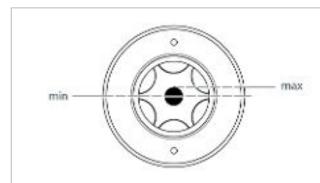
Oil sight glass on bearing casing max Maximum oil level min Minimum oil level
